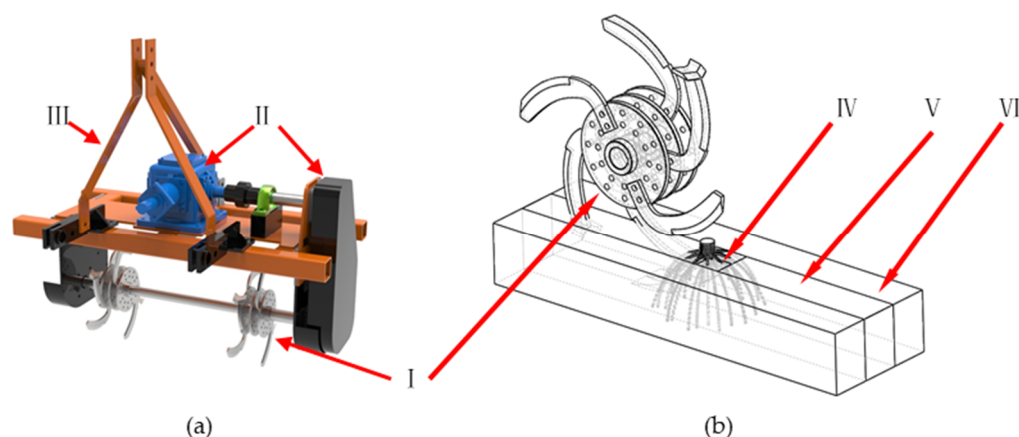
Design of wing-shaped stubble-breaking device: (a) Wing-shaped stubble-breaking device: I: wing-shaped blade set; II: transmission system; III: frame. (b) Operating principle of wing-shaped stubble-breaking device: IV: maize stubble; V: strip tillage area; VI: untilled area.
